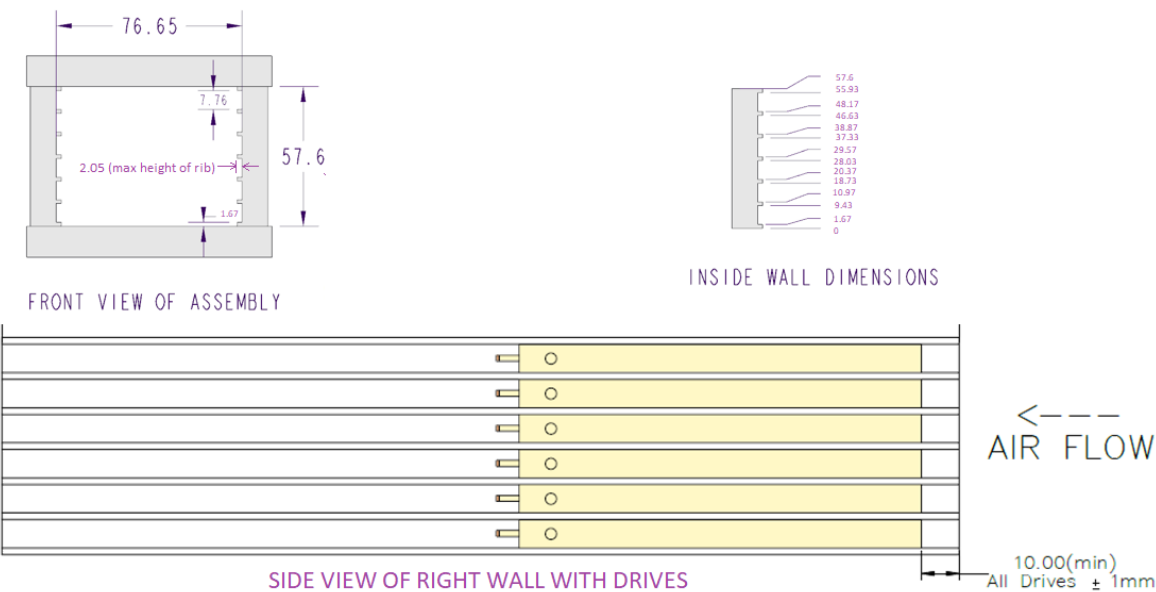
Required Dimensions of E3 1T Test Fixture
